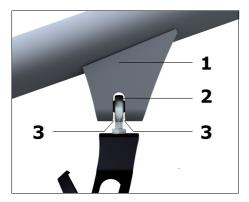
The rod end (2) must not touch the rod end mount (1)
